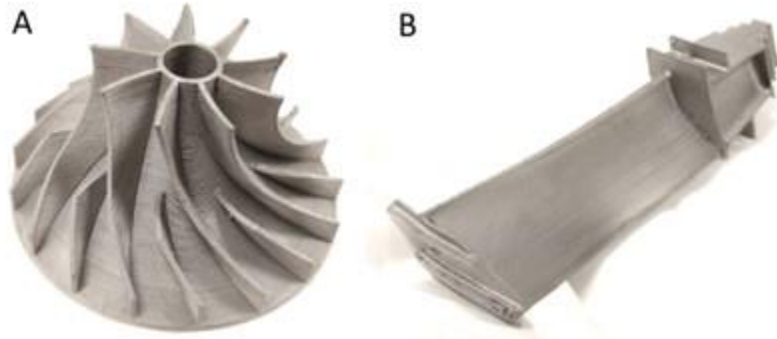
Additive manufactured a) pump impeller; and b) turbine blade
